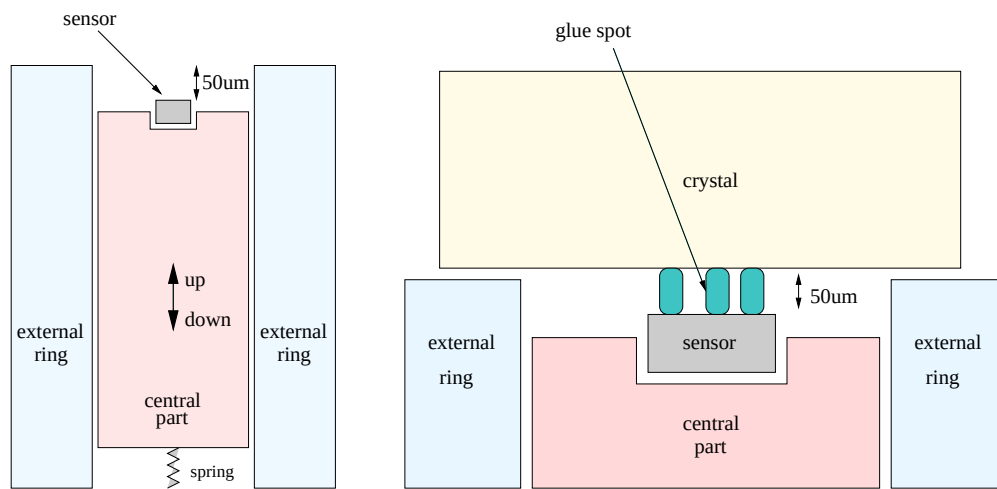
Schematic drawing of the way the gluing tool works.
